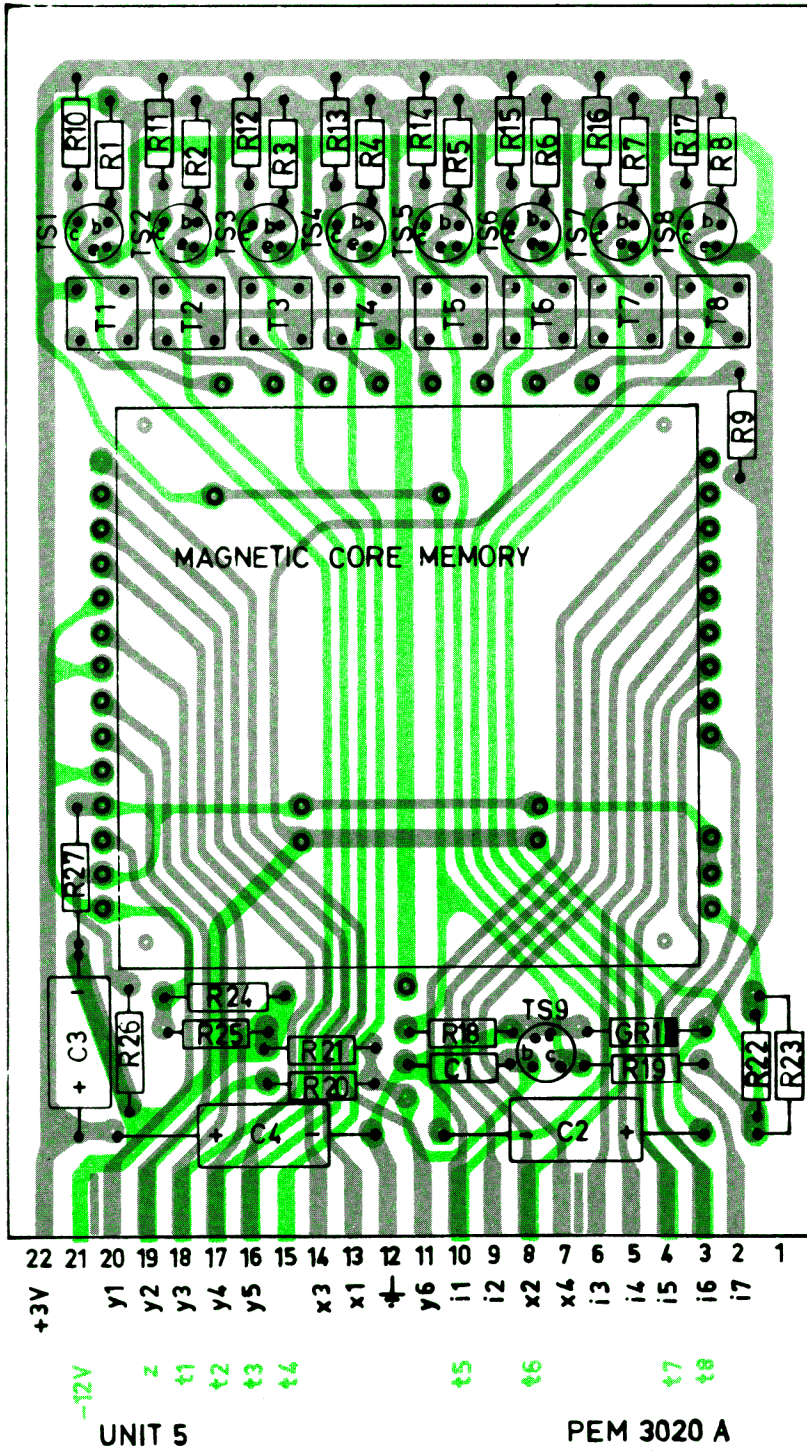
Printed wiring board, memory (A version), Unit 5
